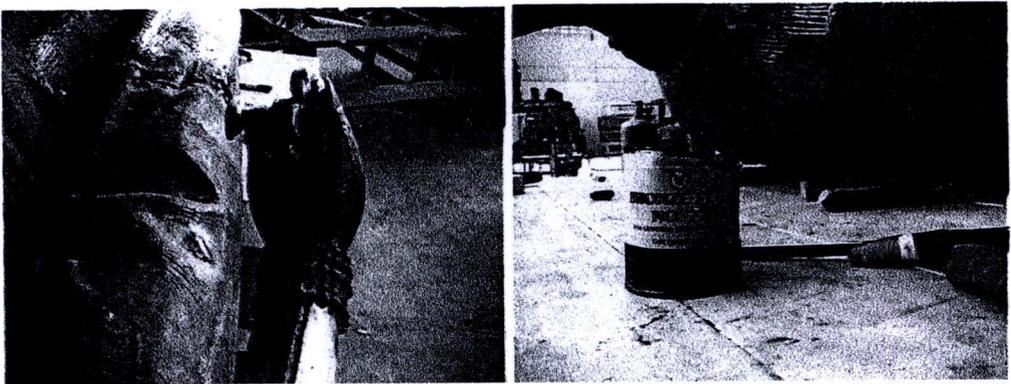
Joining the pieces together with Bronze Flux, a material for welding bronze.
